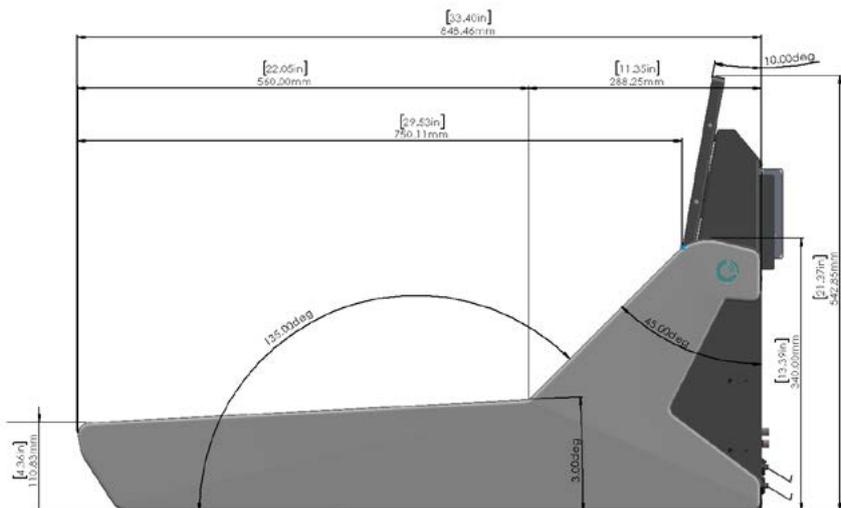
FLOOR STAND FITTED ADJUSTABLE FEET, END ELEVATION ARGO S
